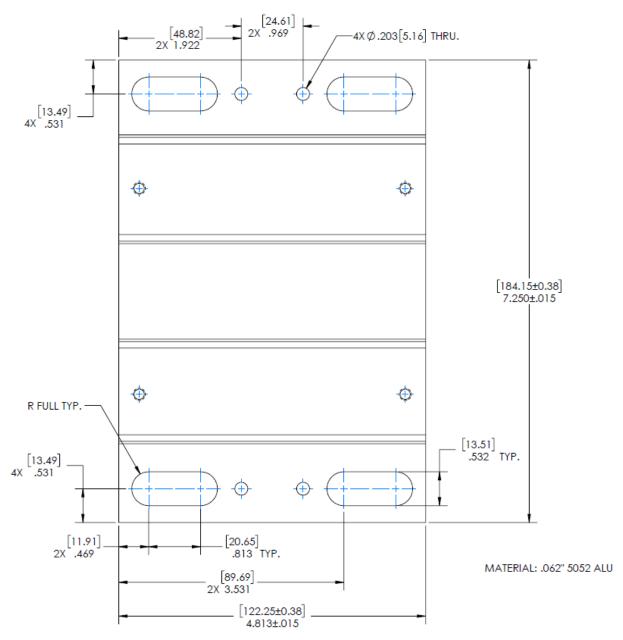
Model 8002-7 Aluminum Mounting Bracket Dimensions
